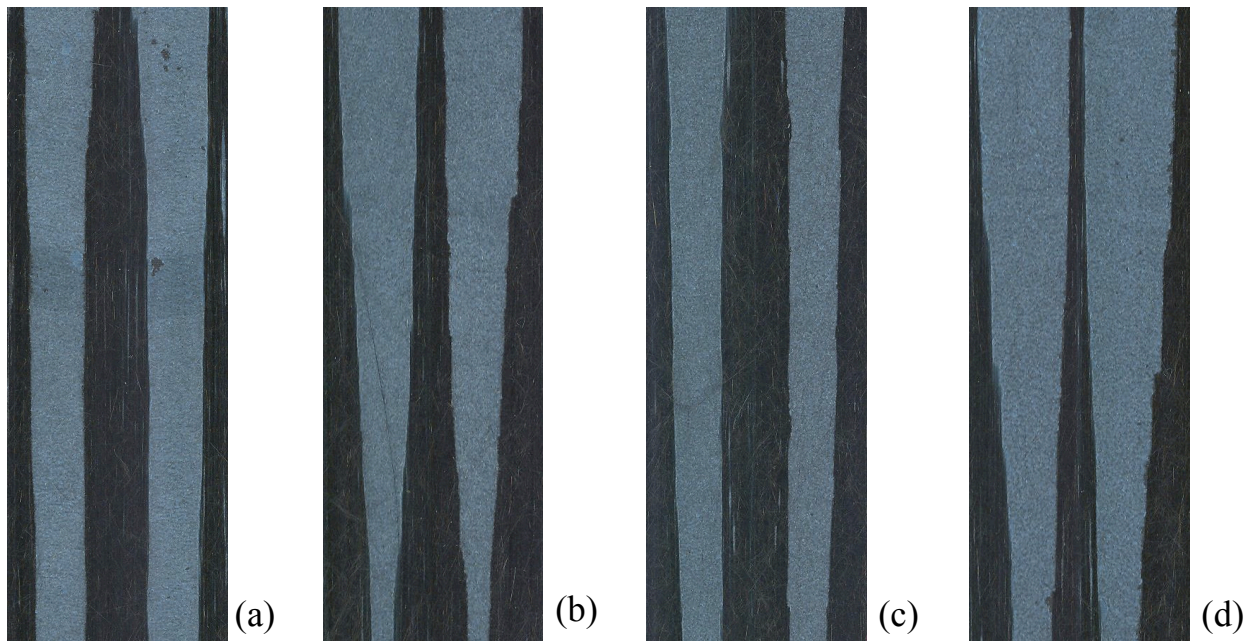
Representative DCB fracture surfaces for (a) 4 h, (b) 168 h, (c) 408 h, and (d) 720 h exposure times.
